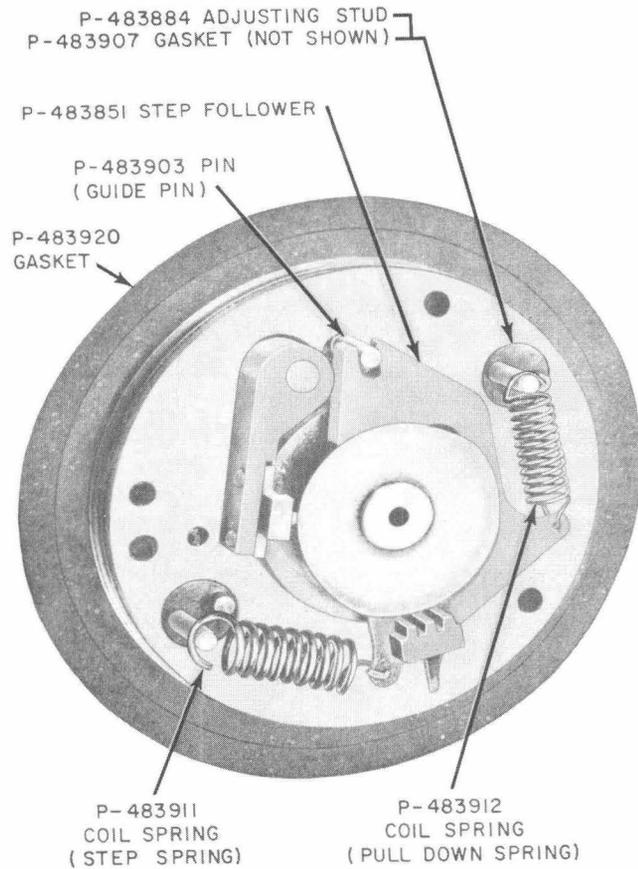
KS-13835 Reader—Stepper Plug Assembly—Portion Inside of Shell (Plug Removed from Shell)
